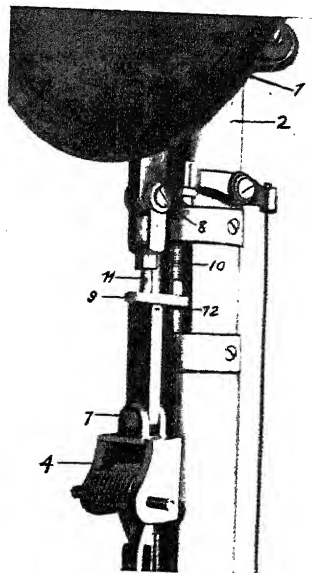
Detail, illustrating method of attaching grip and device for preventing recoil of spring.
